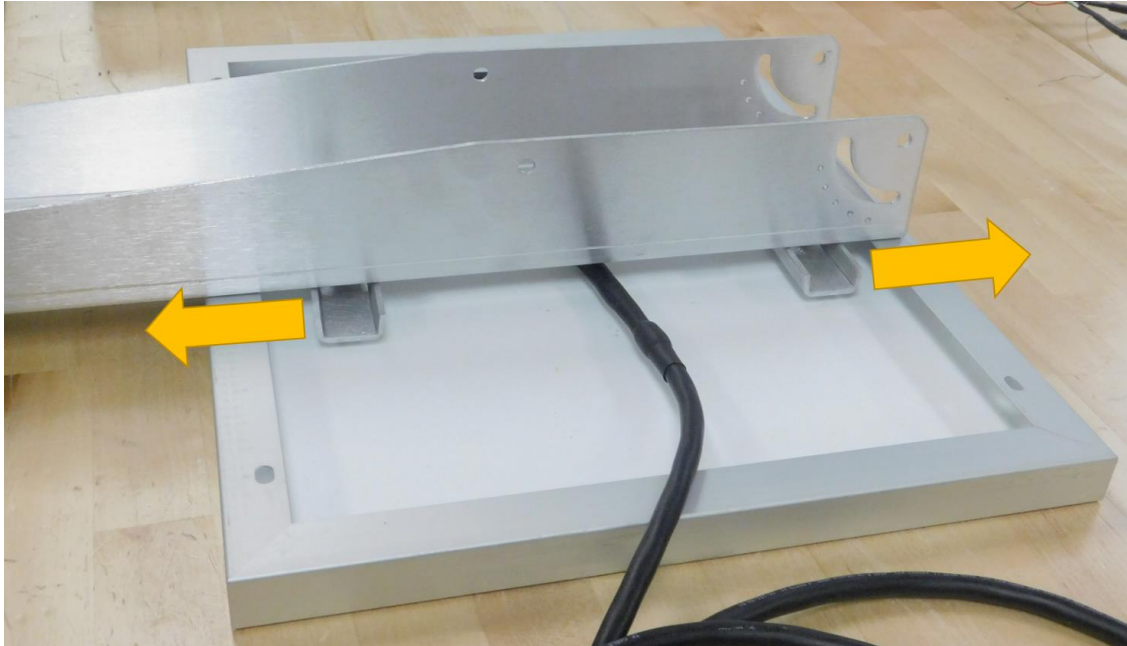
SECURING PANEL BRACKET TO PANEL WITH CLAMPING BRACKETS
